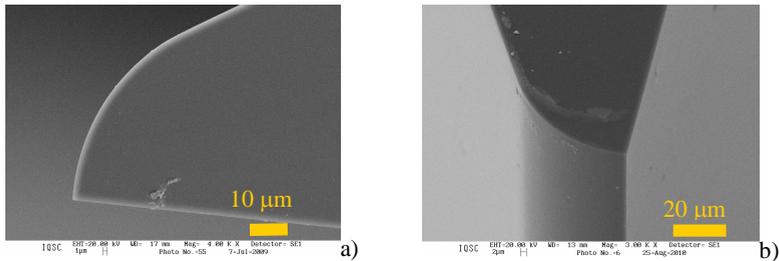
SEM view of the cutting edge of the diamond tool used a) Before machining and; b) after machining.
